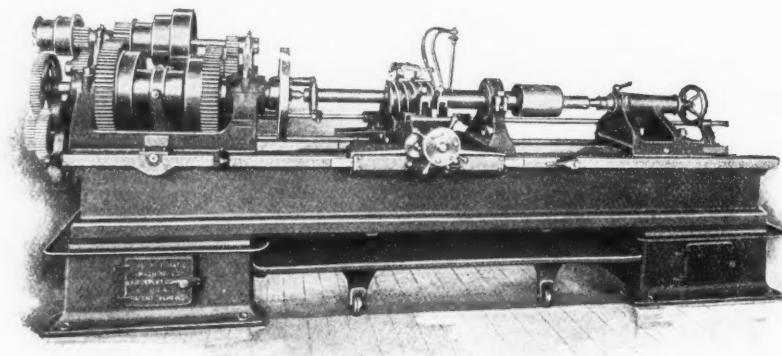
Automatic Threading Lathe for Worms, made by The Automatic Machine Co.
